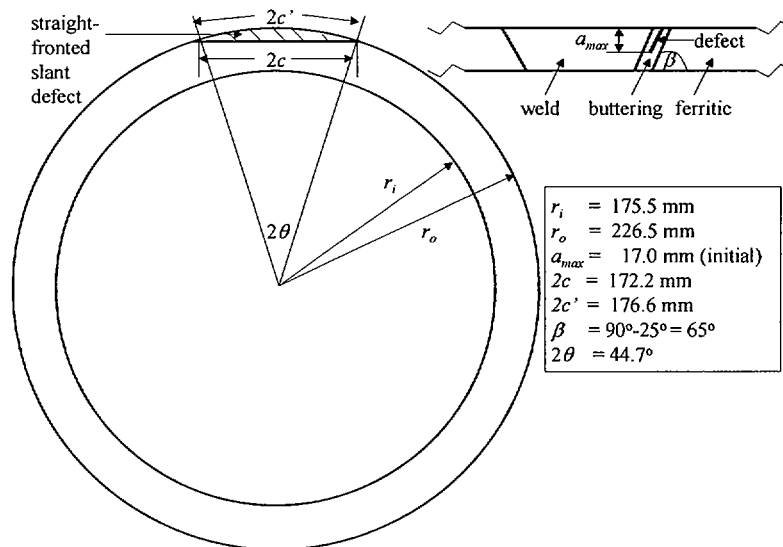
Geometry of defect in ADIMEW test specimen showing associated dimensions
